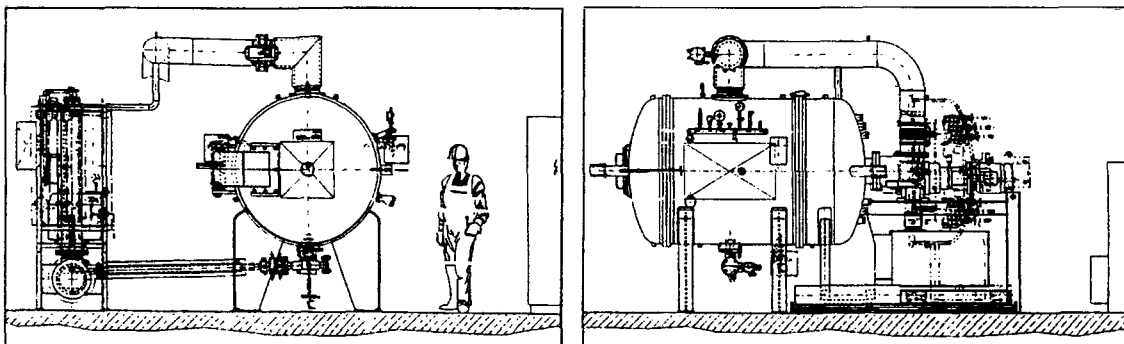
Vacuum Dewaxing and Sintering Furnace Type VKUgr 60/60/100, with rapid cooling, rearside of the furnace is also shown in open position.
